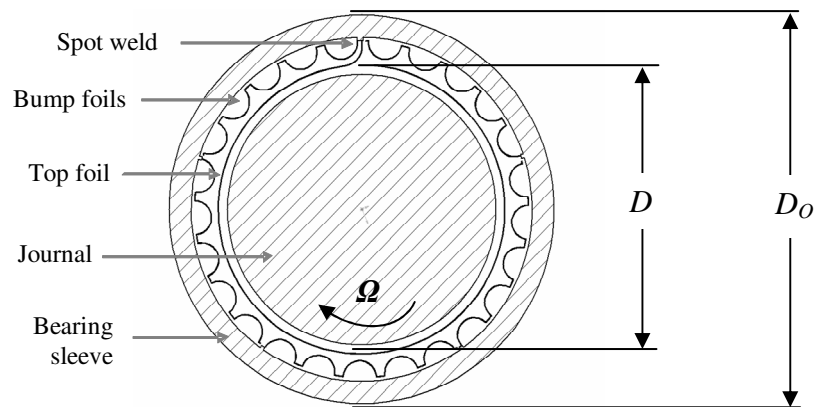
Cross-section of journal and bearing assembly labeling major components.
